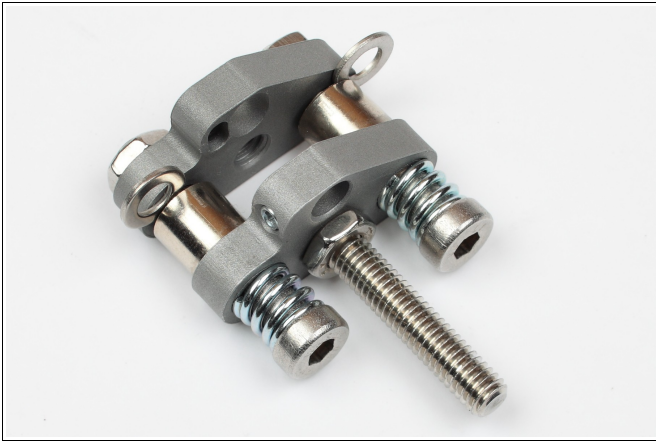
Both plates are turned, at which both the nuts and the magnet plate turn inwards. The headless hexagonal socket screw M6x40 is tightened.
